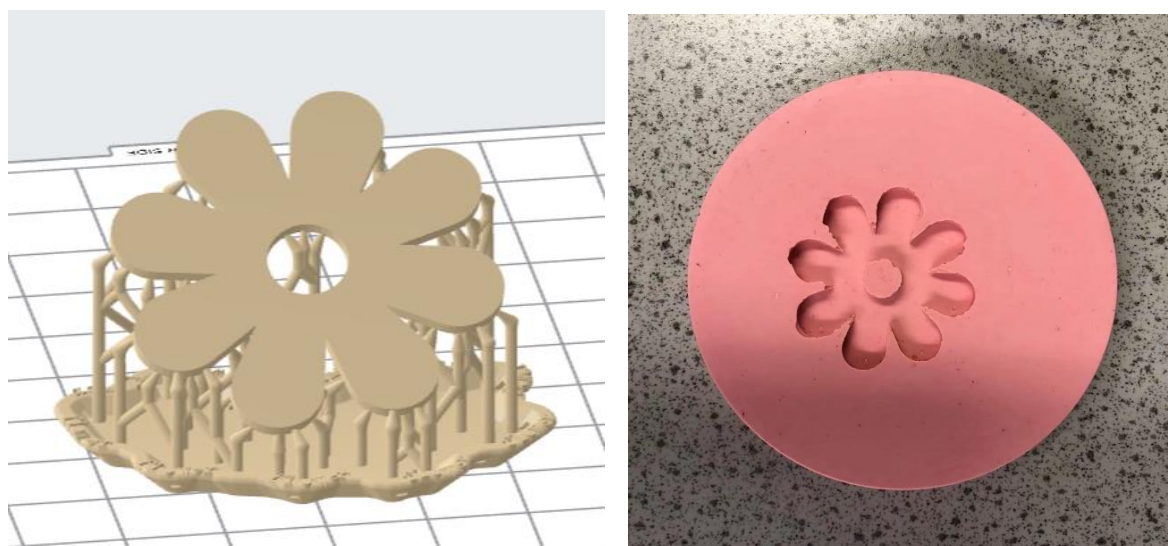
(L) The designed flower shape set in the Preform software & (R) flower shape silicone mould.
